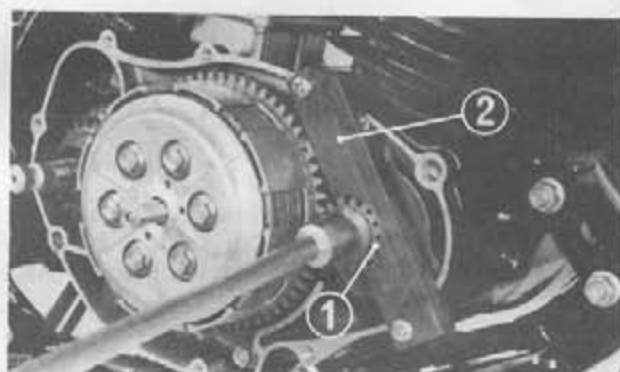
(1) Primary drive gear (NORMAL RH THREAD)
